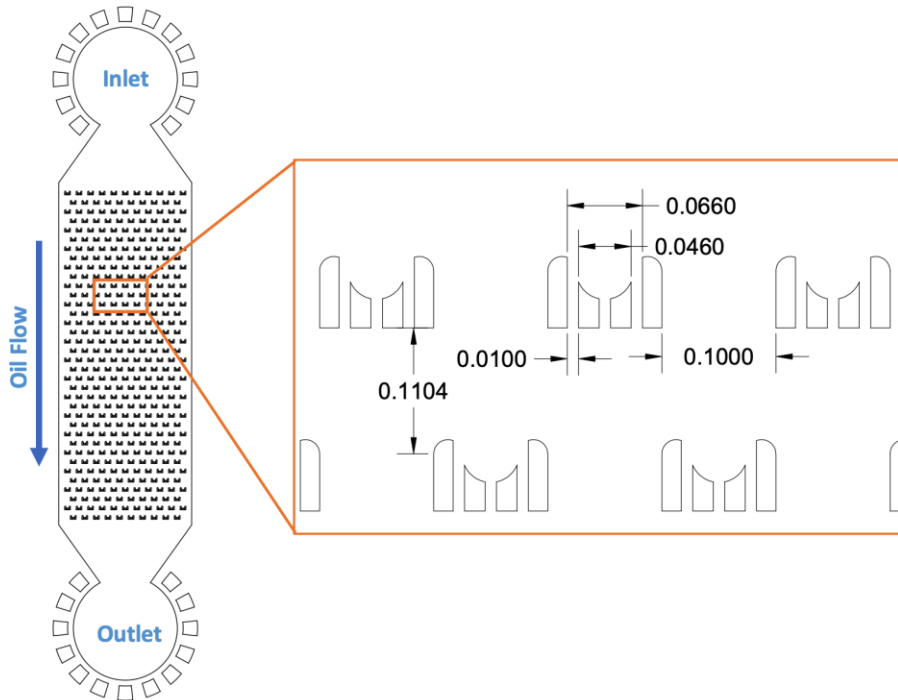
1 AutoCAD drawing and channel dimension specifications for the droplet trapping array device. The labeled dimensions are measured in the unit of millimeter.
